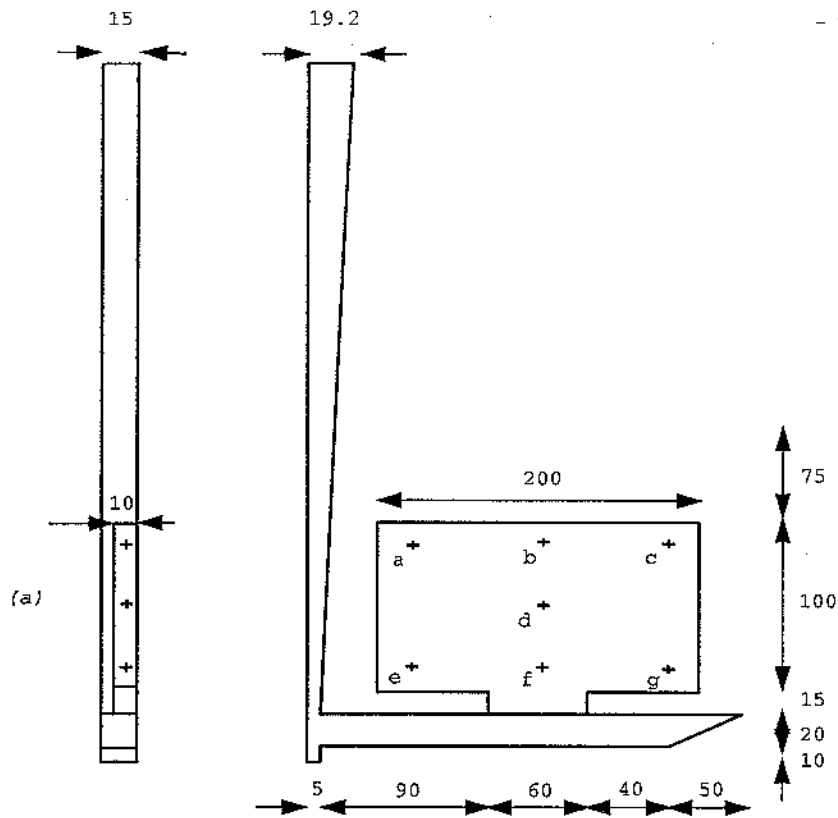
Geometry and dimensions of the test casting and thermocouple *a-g* locations, marked by crosses.
